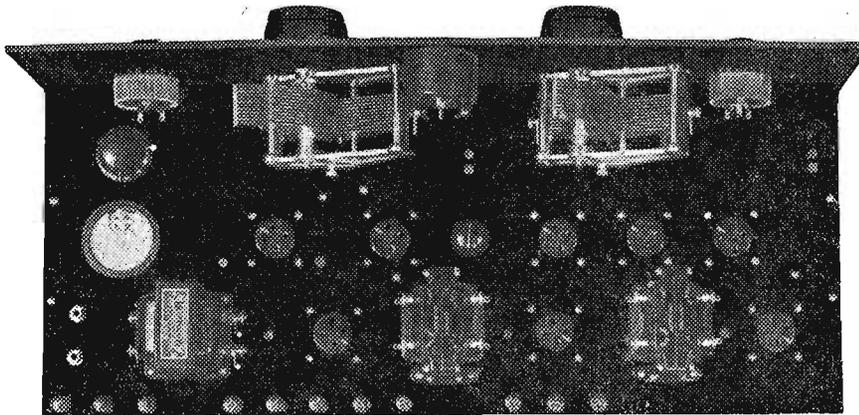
Top View of Assembled Receiver, Showing All Parts in Place
